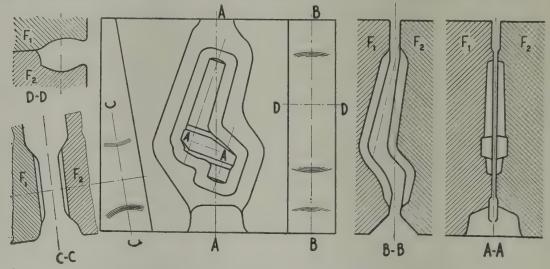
Typical example of multi-impression die with fullering and bending impressions:  $F_1$ —The Lower Die;  $F_2$ —The Top Die
